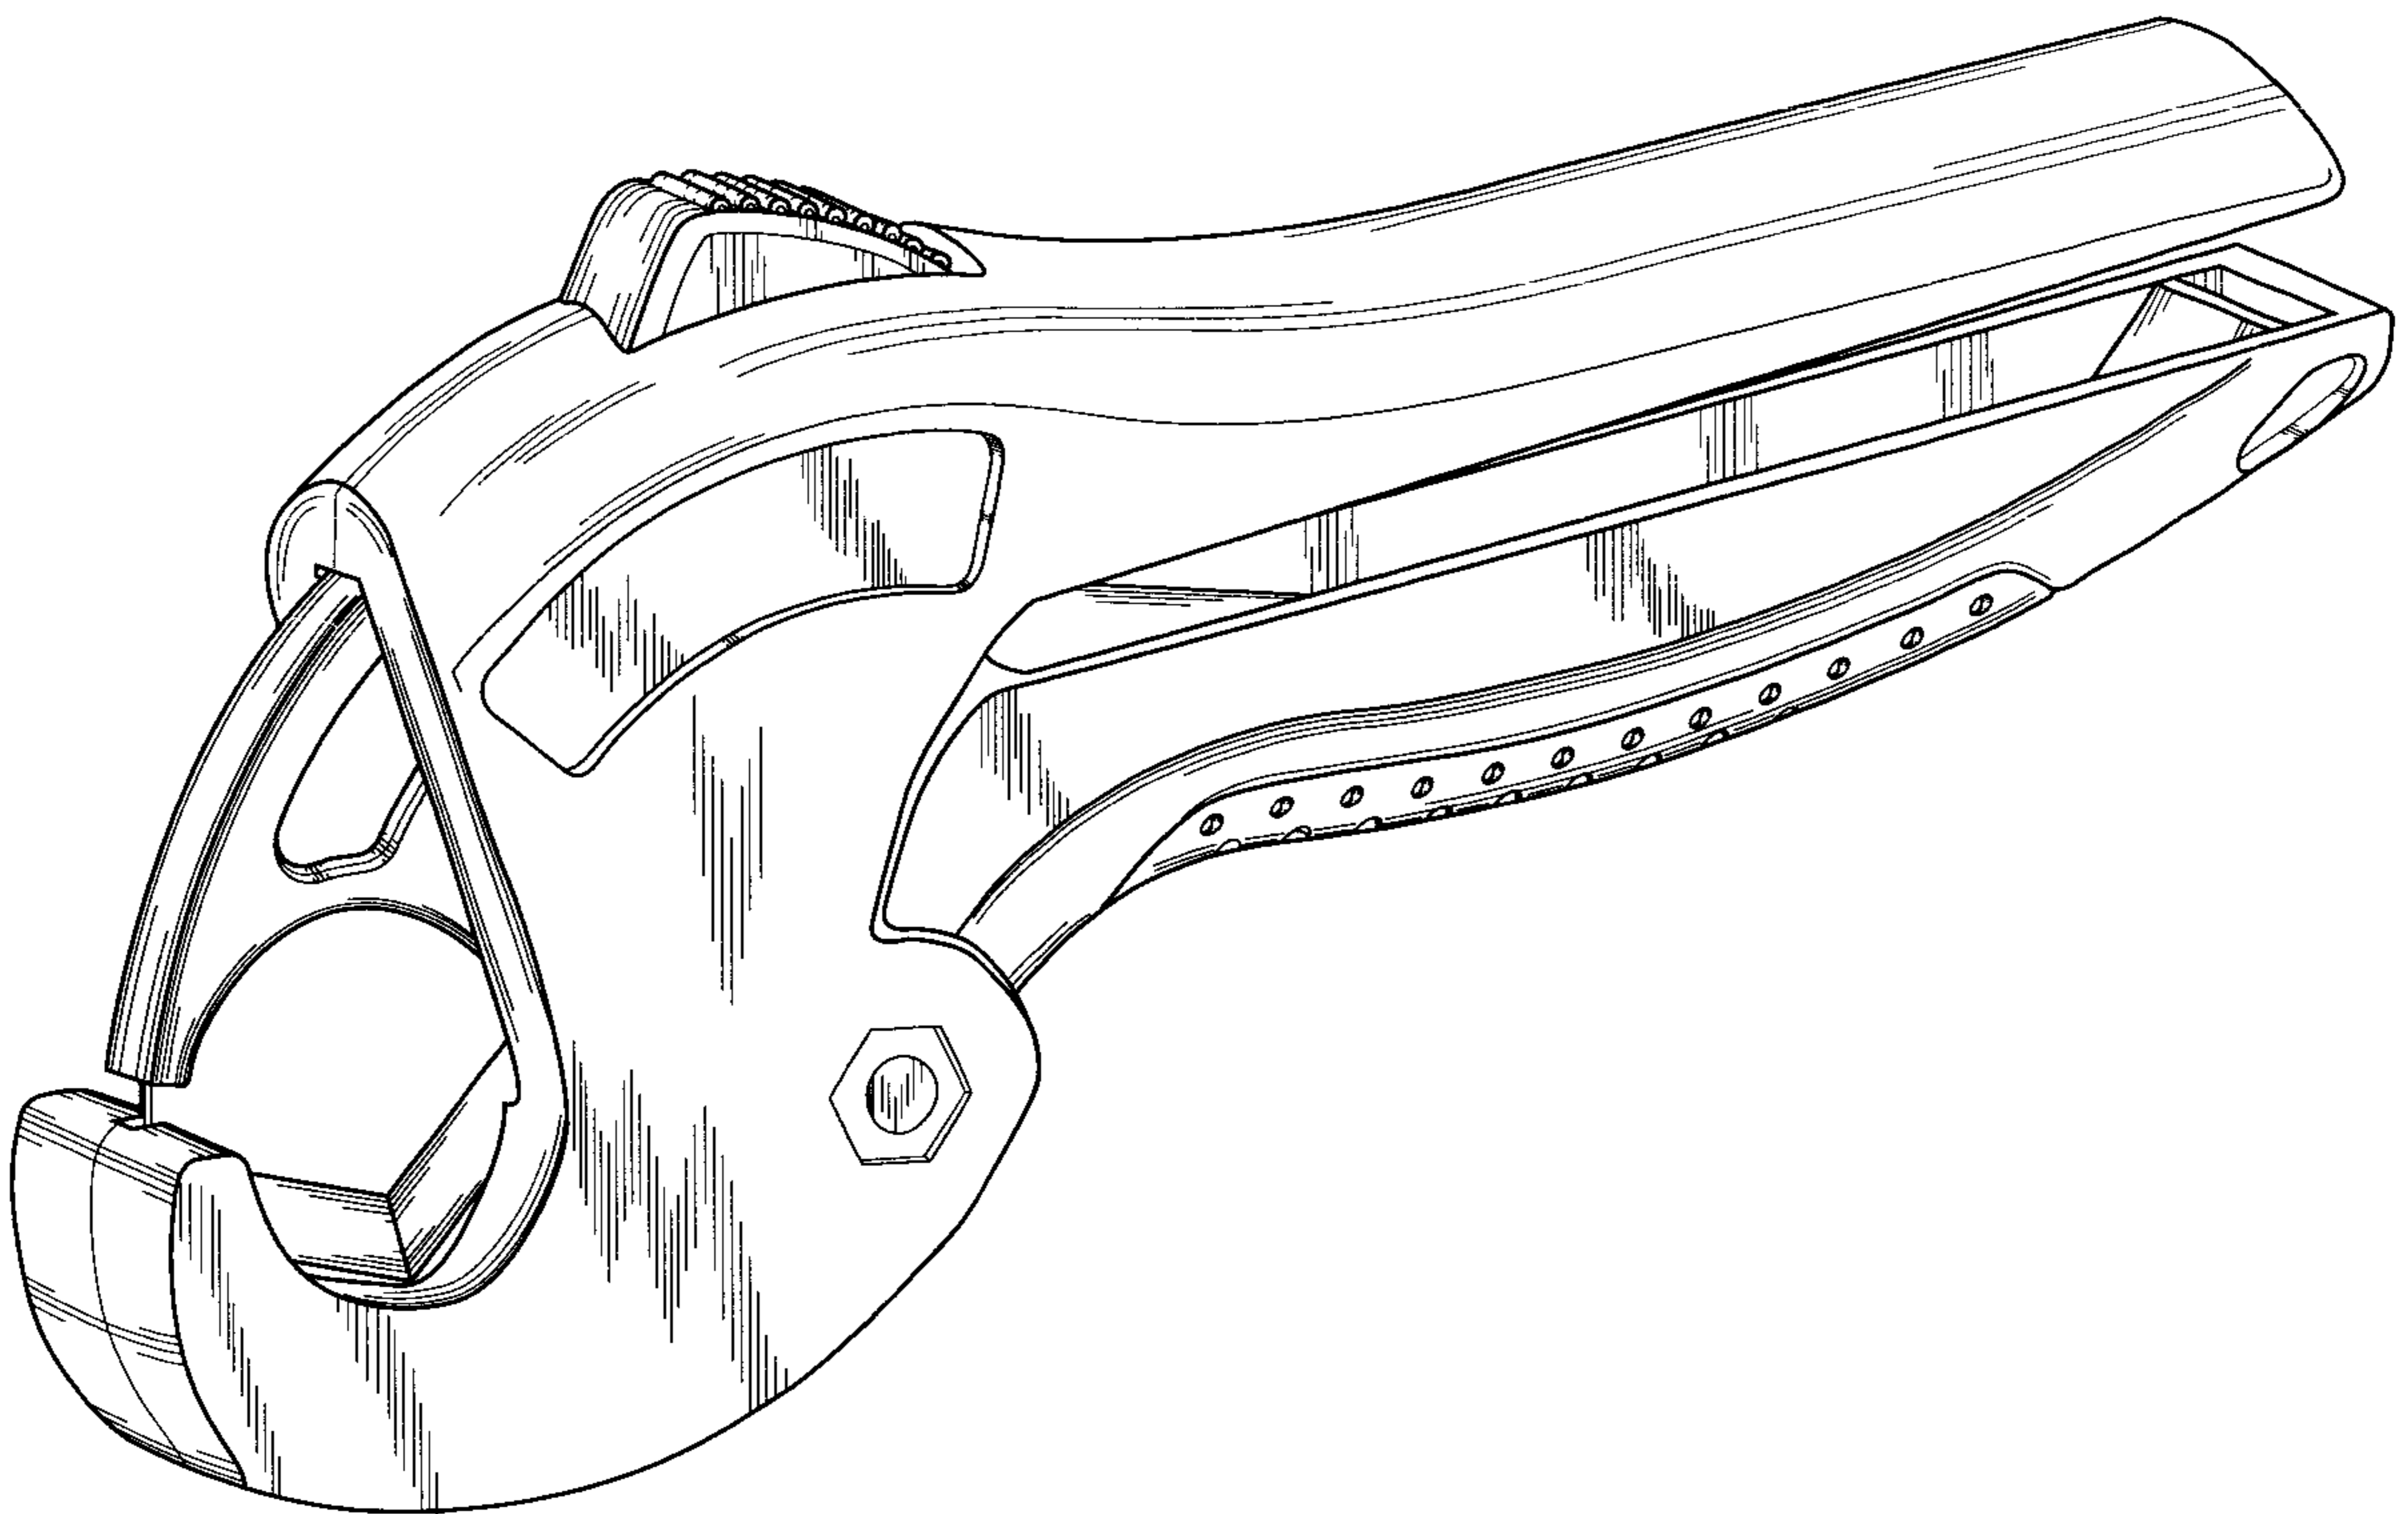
is an enlarged left-side view of my shears for cutting plastic tubes design;
